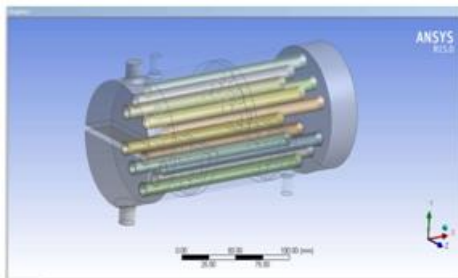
Isometric view of arrangement of baffles and tubes of shell and tube heat Exchanger
